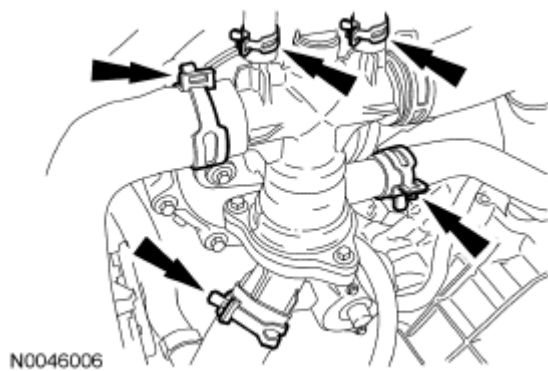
Locating Coolant Hoses To Thermostat Housing
